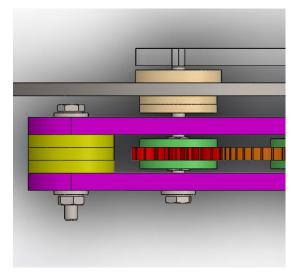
An enlarged top view of the LIM showing the gear spacing technique.
